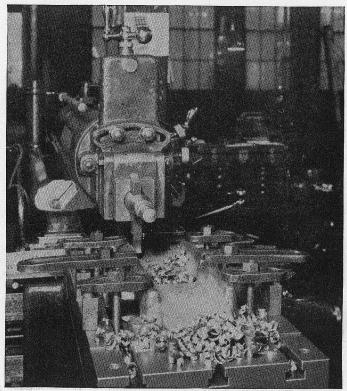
Piece clamped to the table. A side cut is being taken with the clapper box in an upright position. In this position, the operator must make sure that it will clear the top of the work. Some machinists prefer to set the clapper box over in setting up the same job. (*The Cincinnati Shaper Company*)
